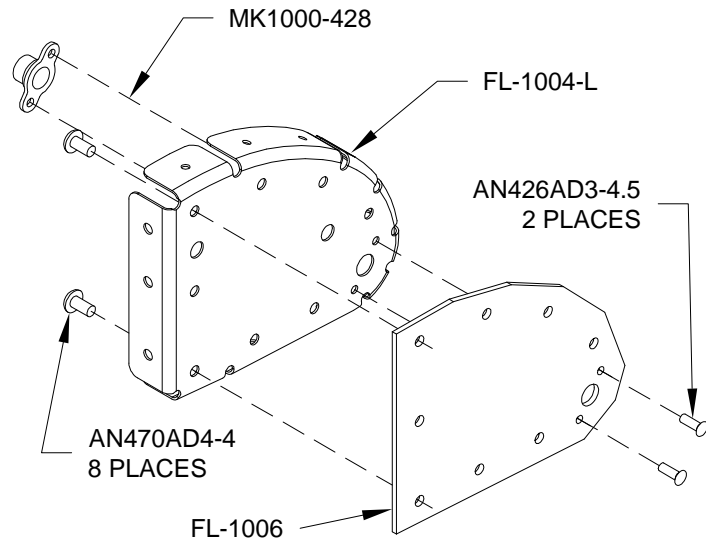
OUTBOARD ROD END RIB SUBASSEMBLY
